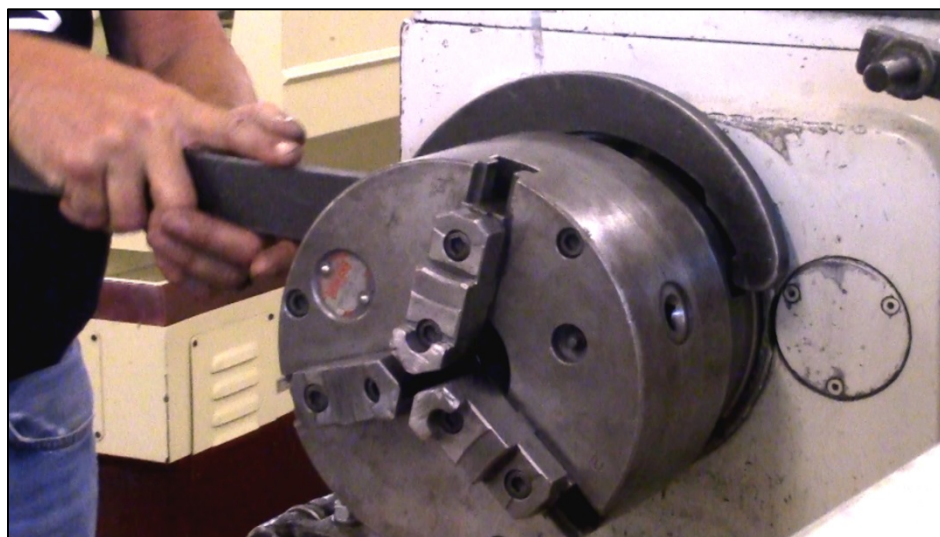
THE INSTRUCTOR HOOKS A SPANNER WRENCH ON ONE OF THE NOTCHES OF THE THREADED COLLAR.
